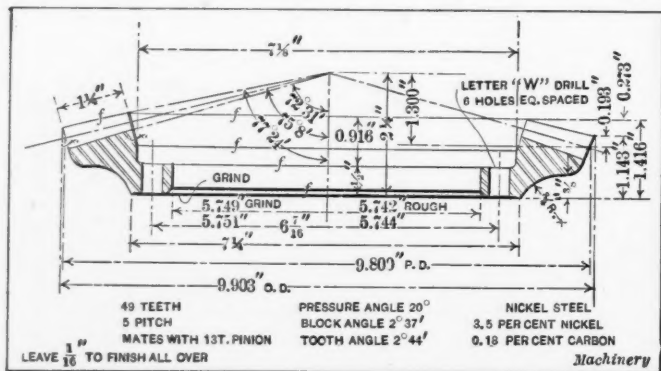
Automobile Main Drive or Ring Gear to be heat-treated
